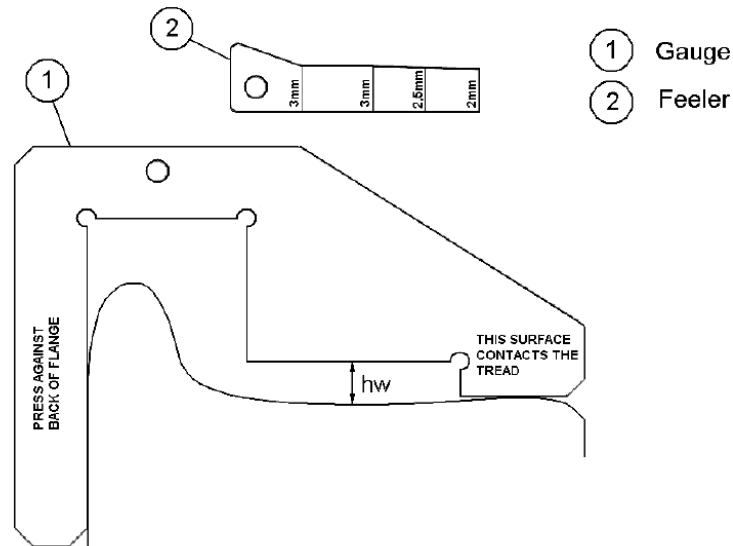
Wheel Condemn Gauge hollow tread indication
